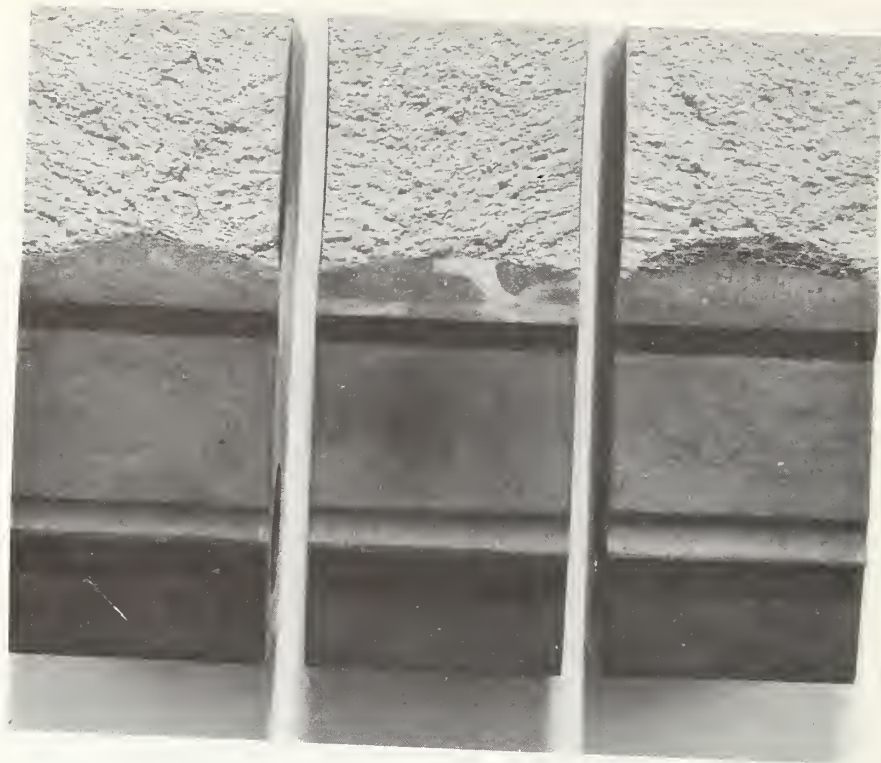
Fracture Surfaces of ASTM A-286 at 4 K
